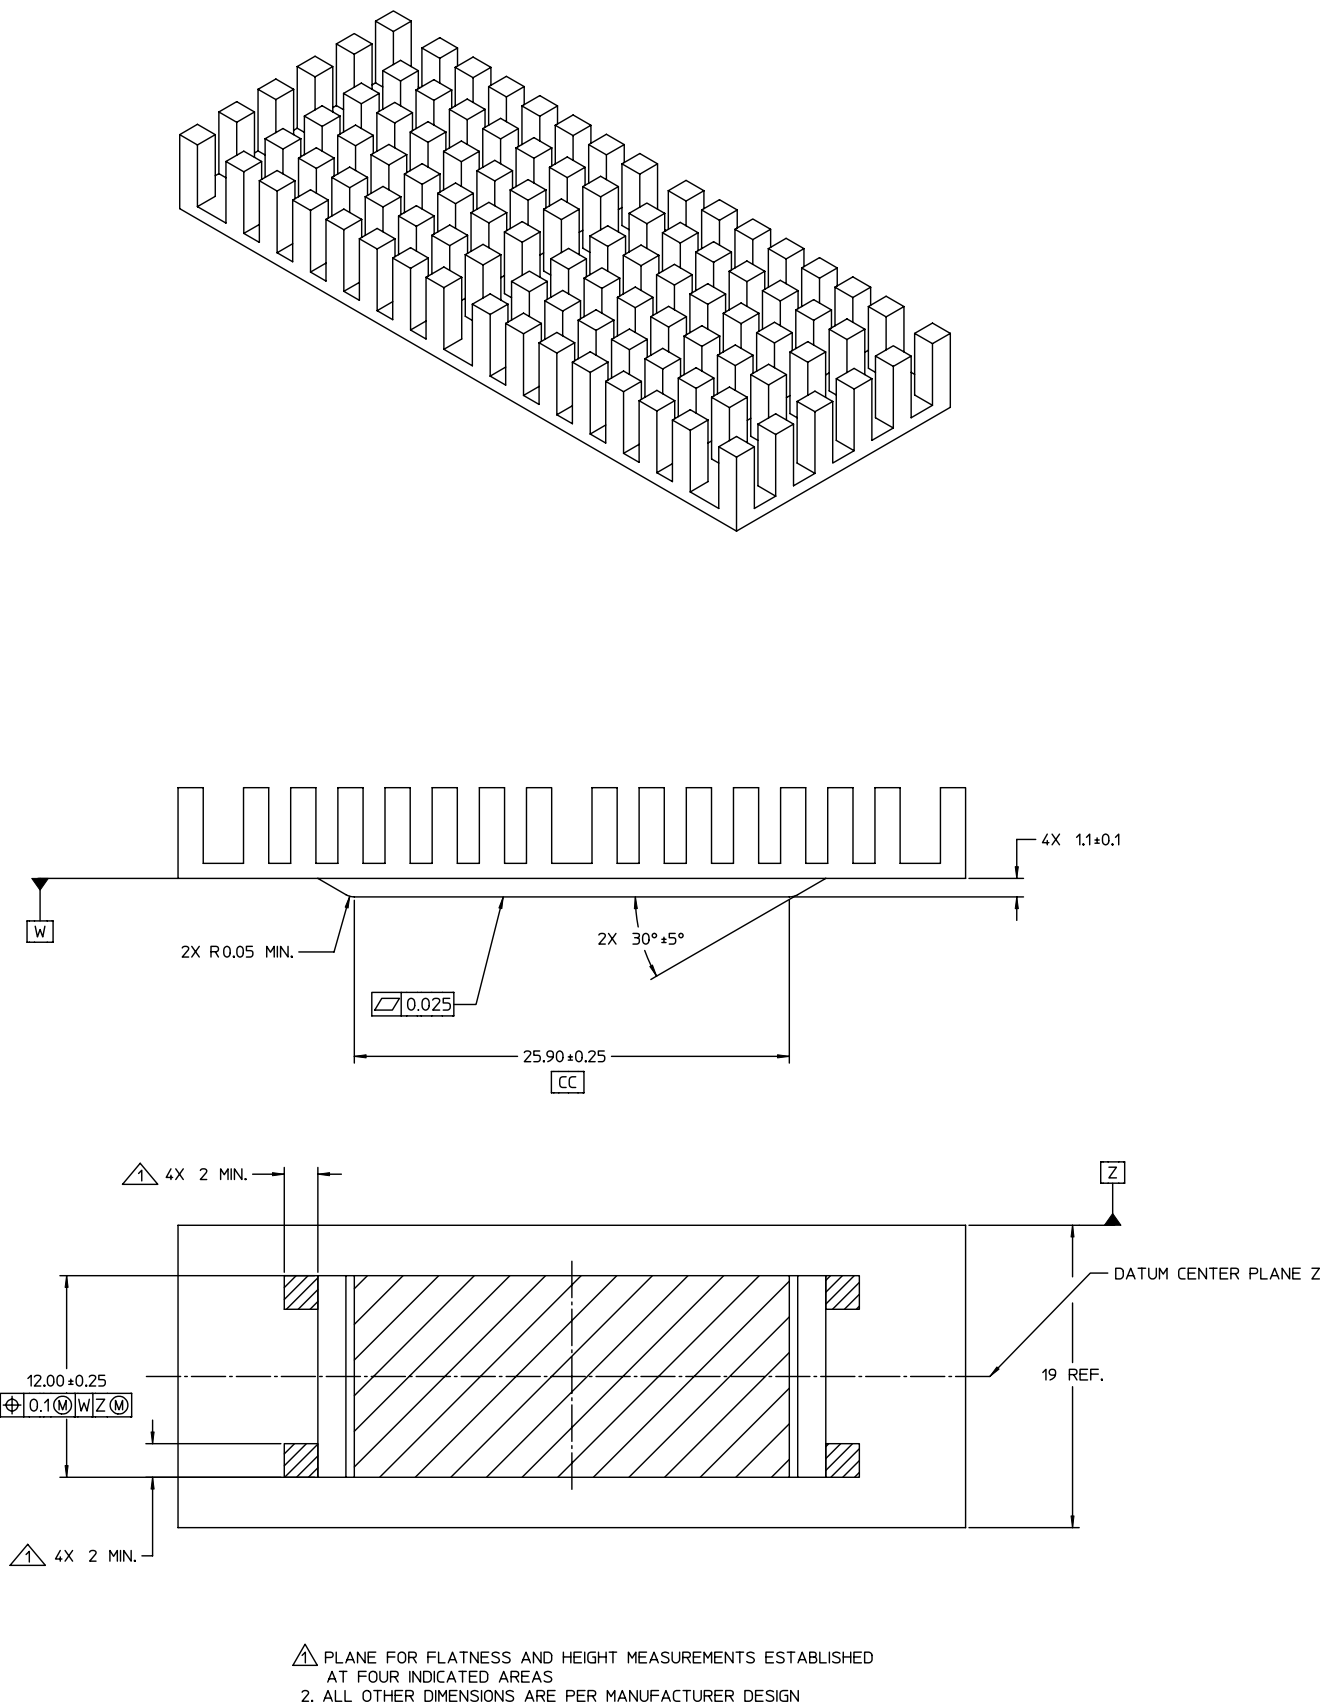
TYPICAL HEAT SINK CONFIGURATION
